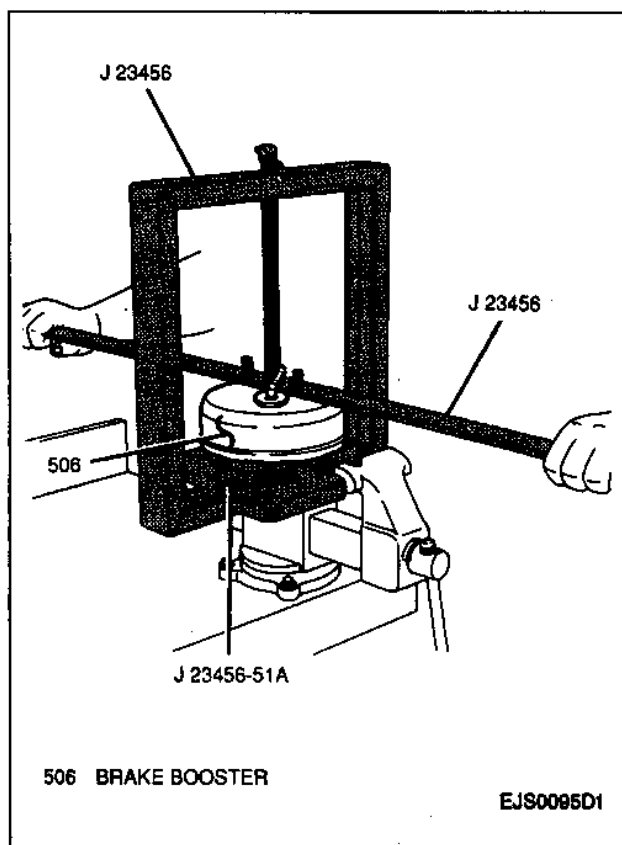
Rotating Brake Booster Front and Rear Bodies for Separation
